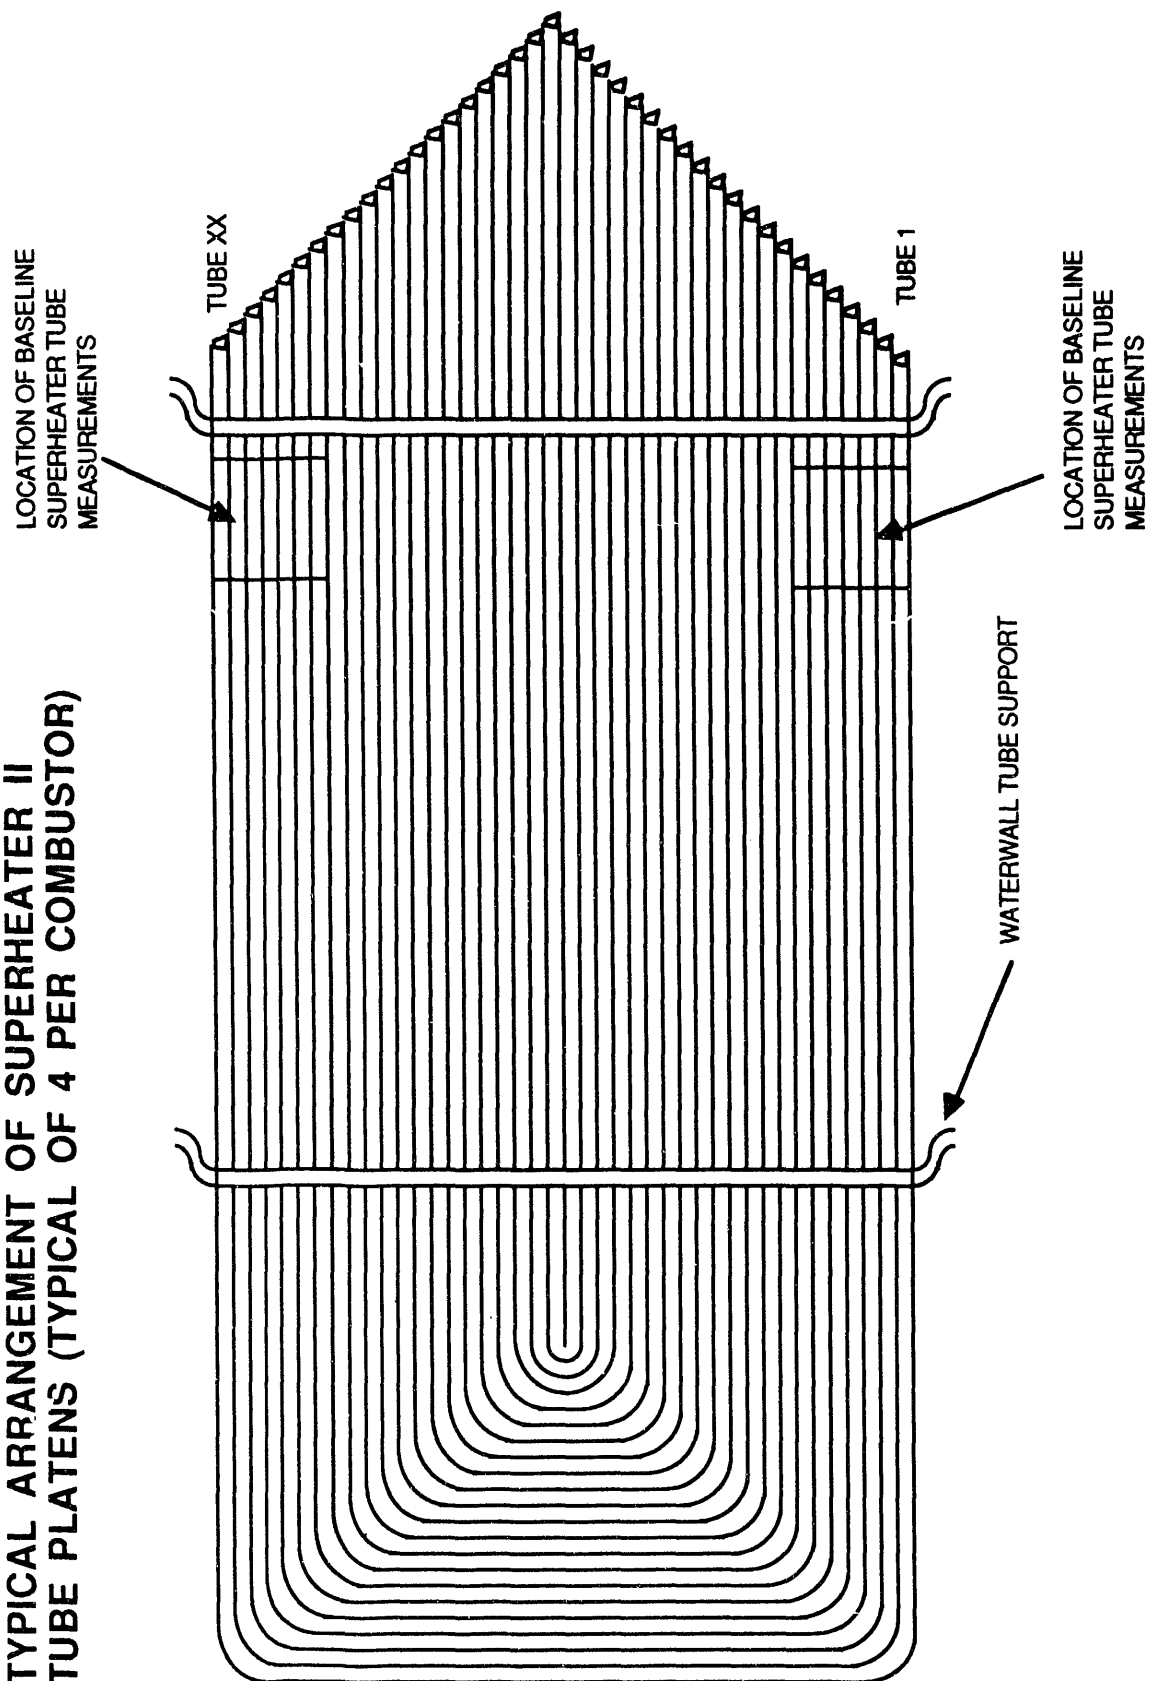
Location of Baseline Superheater II Tube Measurements.
